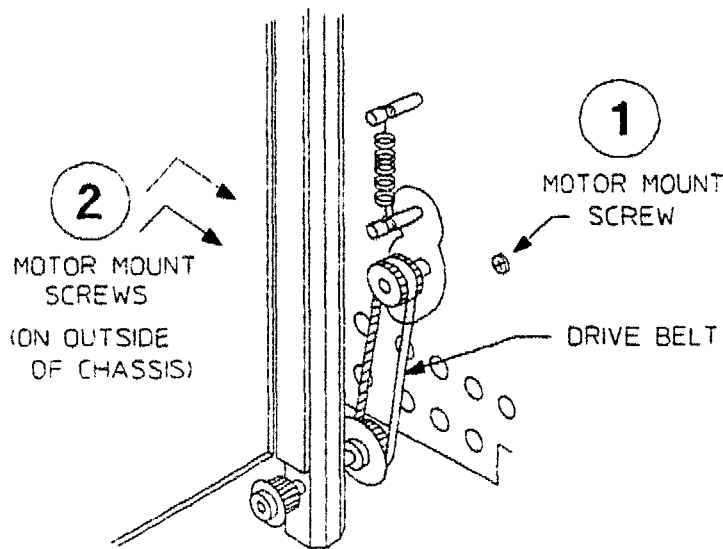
Picker Motor Mounting Screws and Drive Belt
